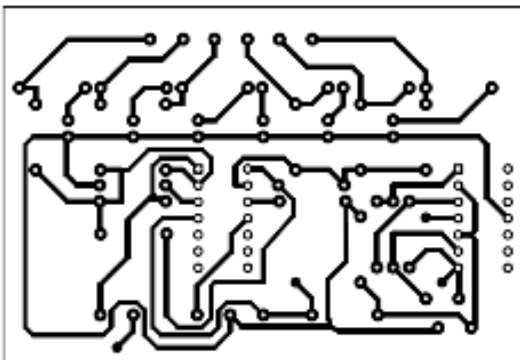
Error and Triangular Wave Circuit PCB Layout
